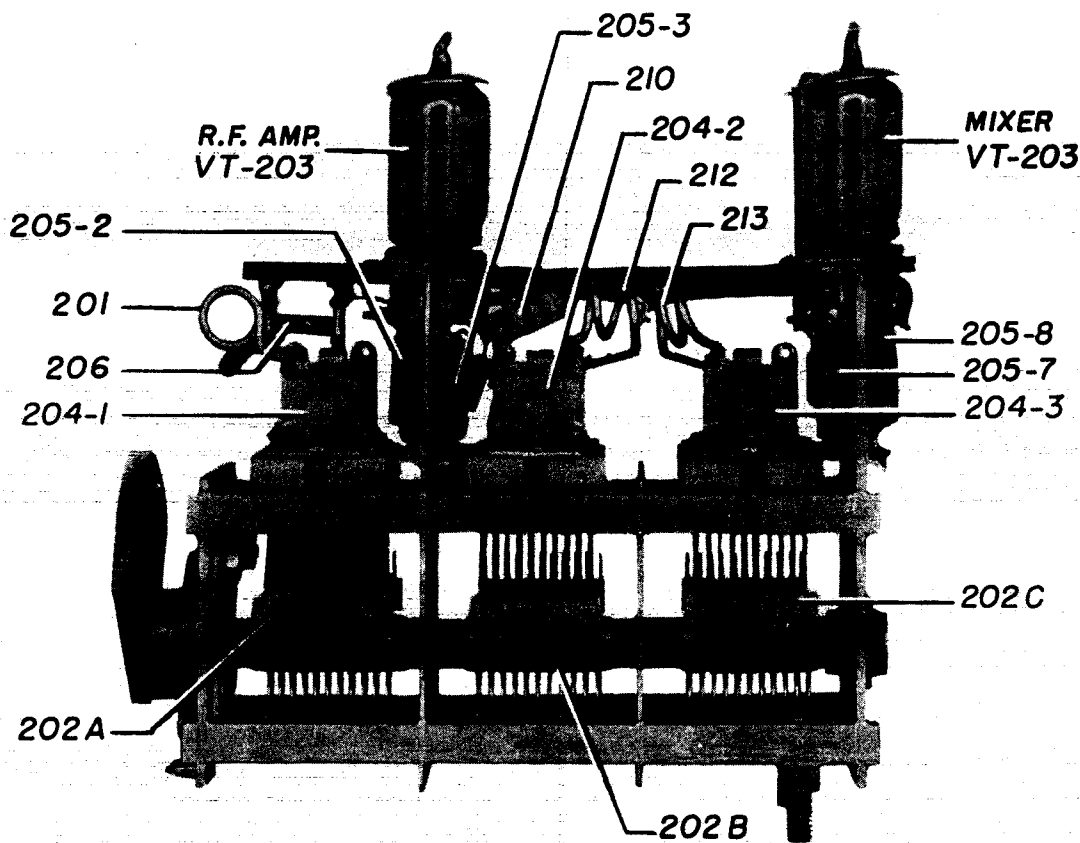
Radio Receiver BC-639-A, Right Side View, R. F. Assembly
